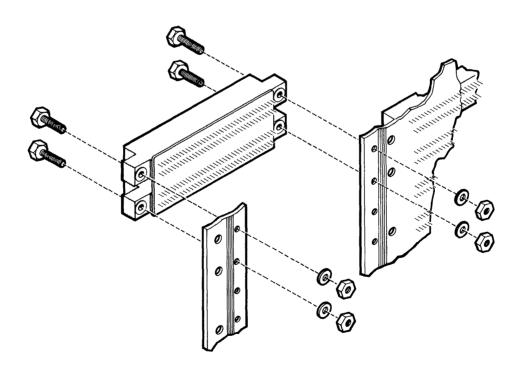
Dual Auxiliary Connector Mounting to Backplane
